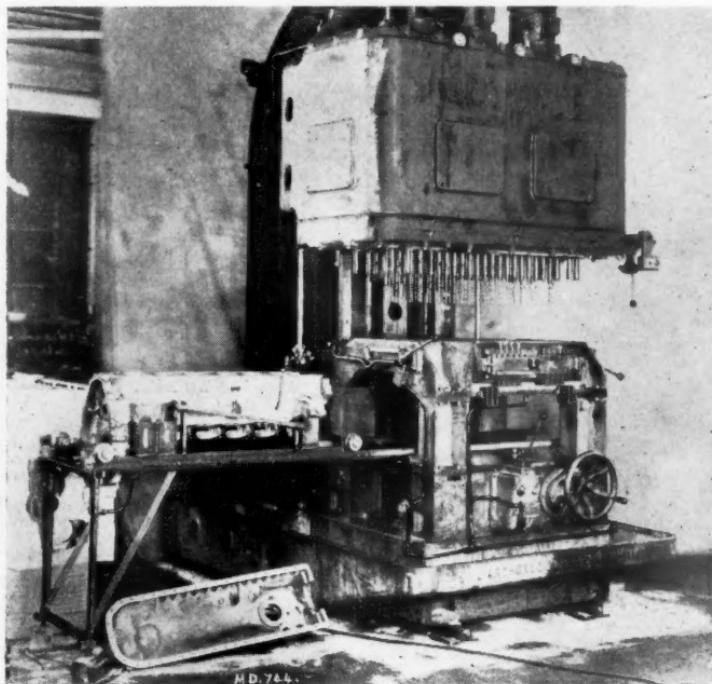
Archdale, size 5, Multi drilling machine. Drilling and counterboring 61 holes in engine crankcase and engine sump. This machine accepts two different components shown at left hand side of machine. Machine and fixture is completely interlocked.
